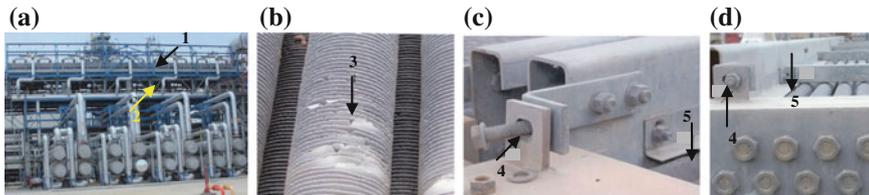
a General view of air cooler (upper part of the picture): 1 locality of failed tubes, 2 locality of fans. b Failed aluminum fins (3 the location of damaged fins). c Improper connection with the bolt (4). d Bolt (4) connection and failed aluminum fins (5)
